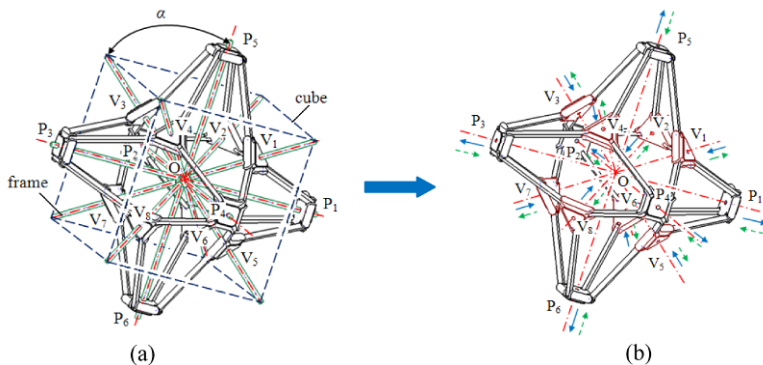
Construction of a 24-PRRP-evolved radially reciprocating motion mechanism.
